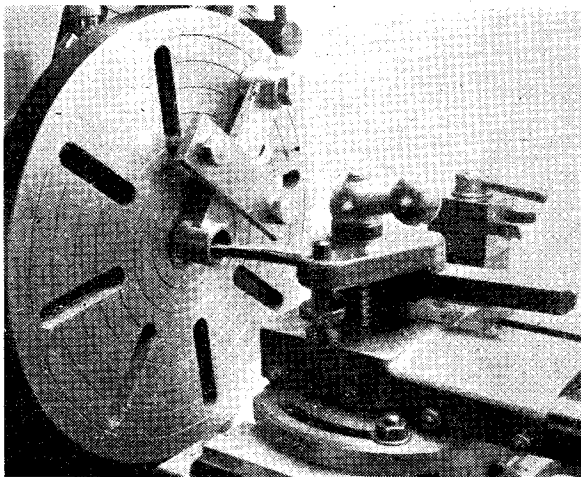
Machining the connecting-rod of the slotting attachment. For the sake of clarity, the balance weight has been removed from the faceplate
